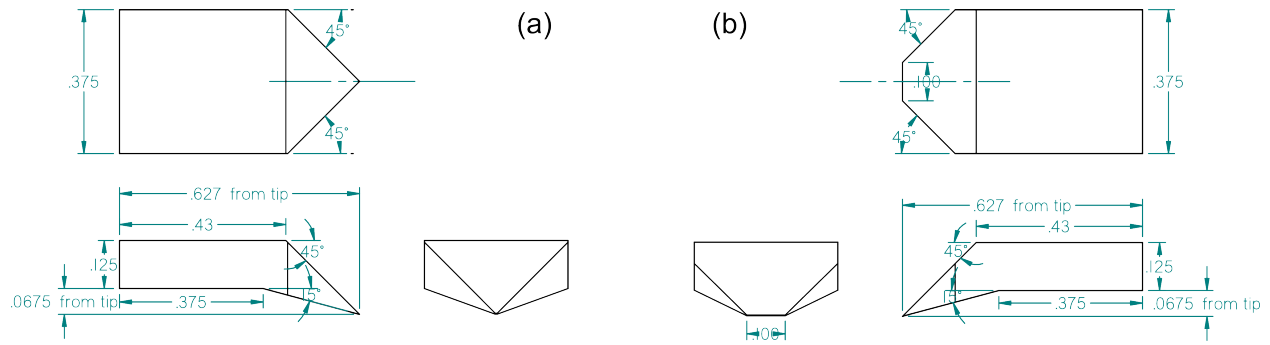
Mechanical design of the pole pieces. (a) Top piece. The target length of tip is 250 μm . (b) Bottom piece. Dimensions are in units of inches.
